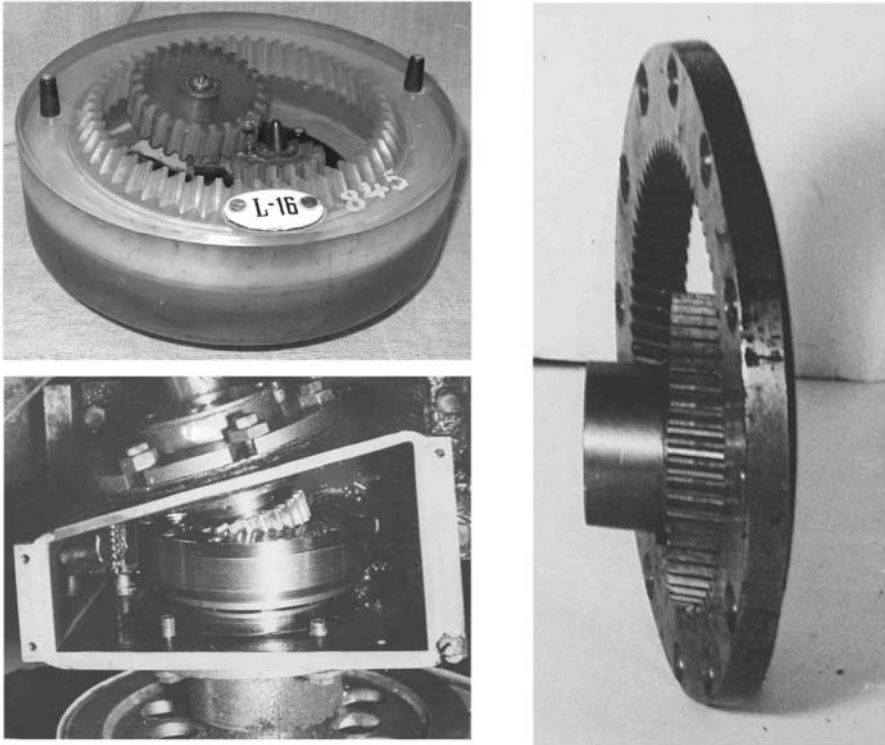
Model of “non-involute” conical internal gearing and experimental assembly for testing such gearing
